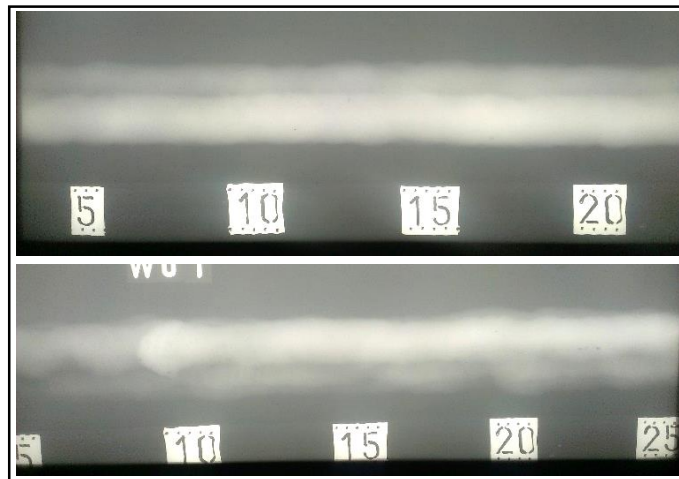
Radiographs of the as-welded plates used for tensile testing.
